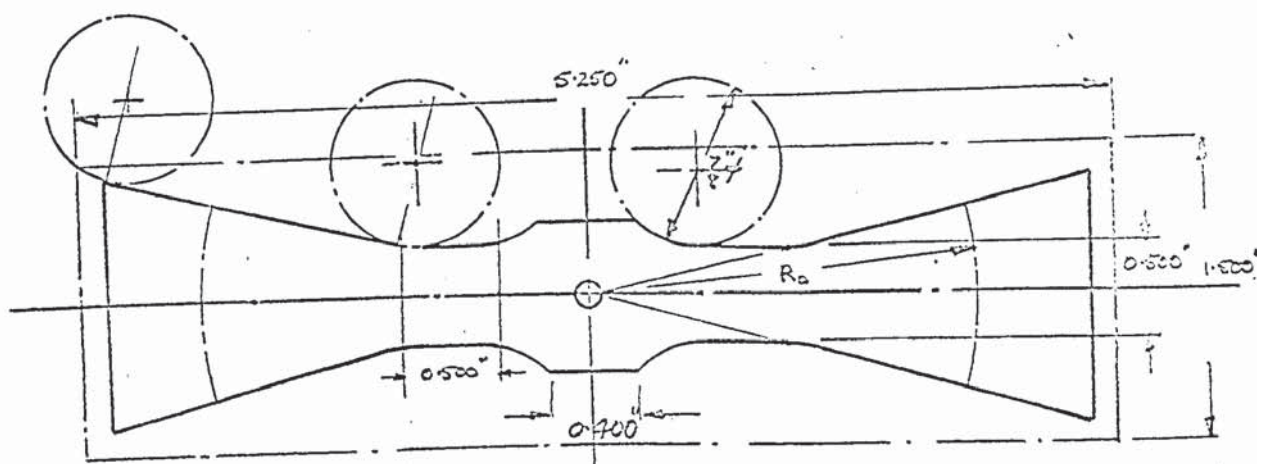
Modified test piece design for 'roller radius' tests.
